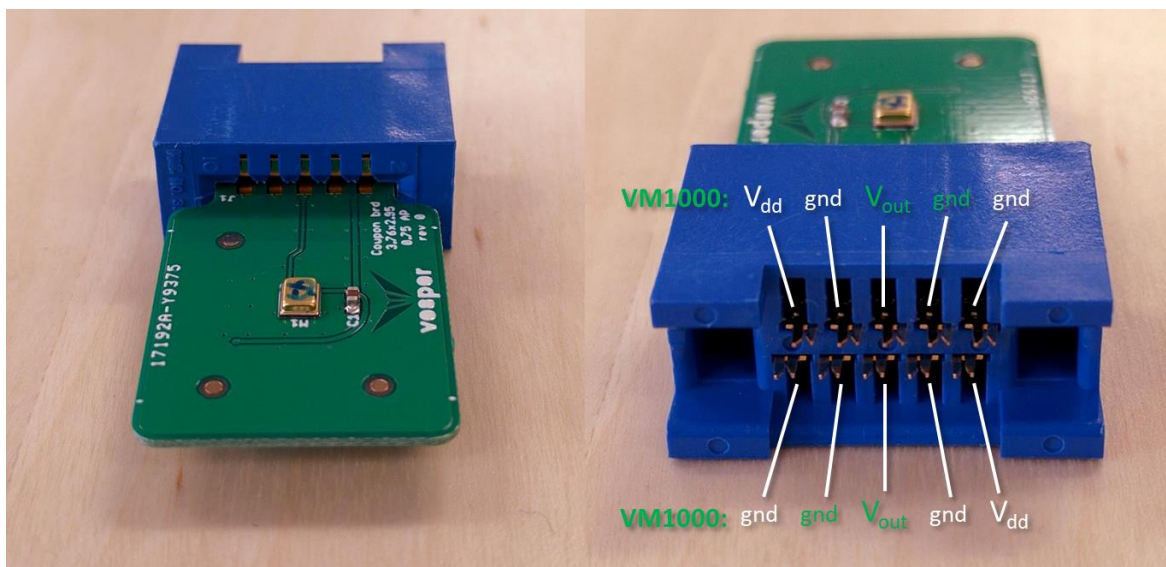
Connections on VM1000 Coupon PCB and Edge Connector CWR-170-10-0000
